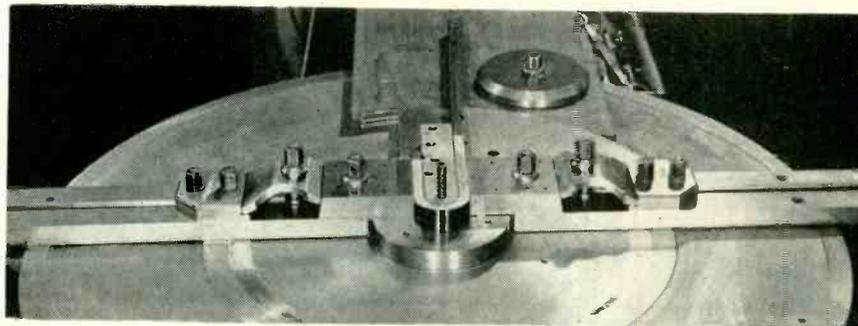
Rectangular waveguide tubing formed into 180-deg bend, with top plate removed after bending to show bend
